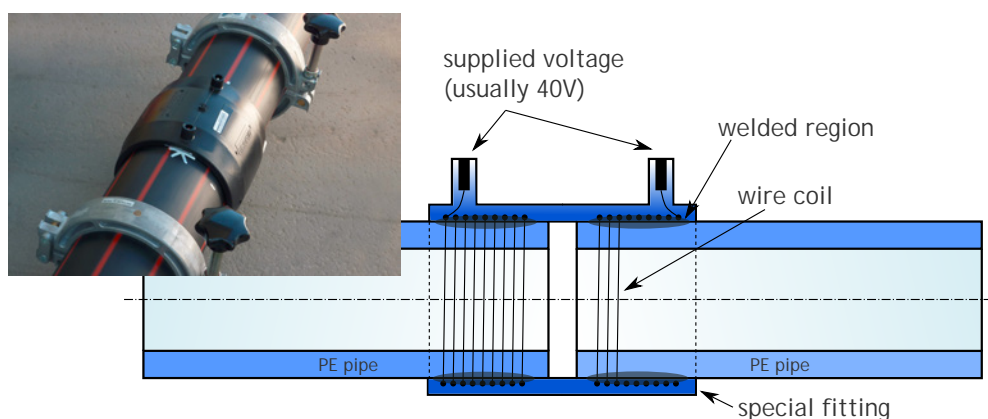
Electro-fusion weld description (the left figure taken from [10])
